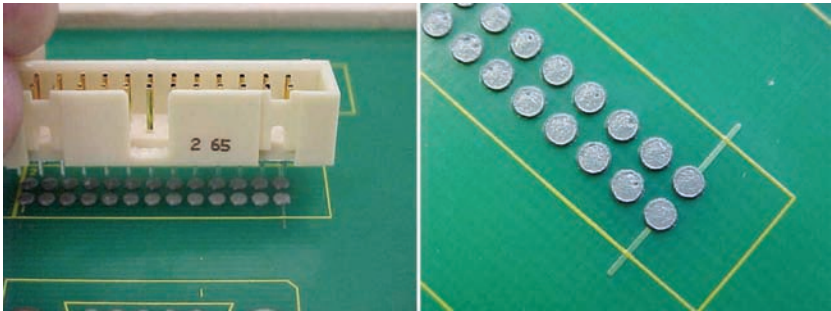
IDC post header being manually inserted after stencil printing with a sealed head printer (left). Solder paste print on the surface of the solder mask (right). In both cases, the image shows a round stencil aperture. Square apertures provide a greater volume of paste than the same size round apertures.
